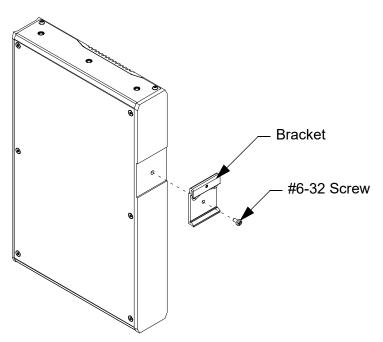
NC-S Node Controller DIN Rail Mounting
